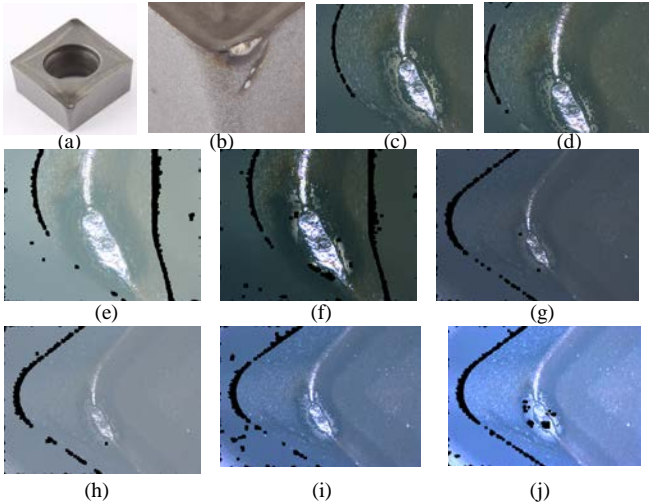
wear on cutting-insert tooling and the figures under different parameters. (a) cutting-insert tool; (b) wear details of cutting insert tool on the major cutting edge; (c~j) the observed figures of the wear under different parameters. And relevant parameters and result assessment of each figure are shown in Table 1.
